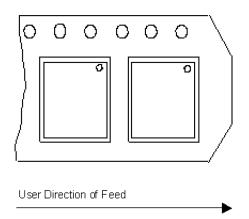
QFN32L 6x6 mm carrier tape dimensions
